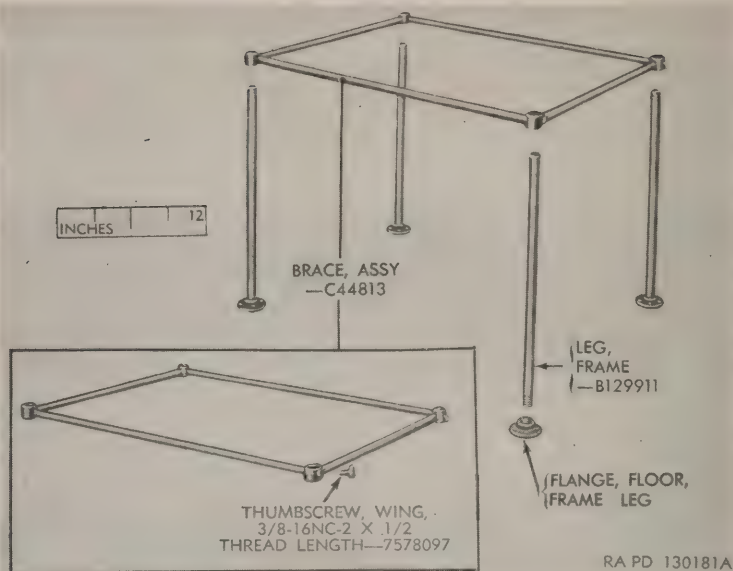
Brace assembly removed from legs—sound-ranging plotting board M1 or M1A1.
